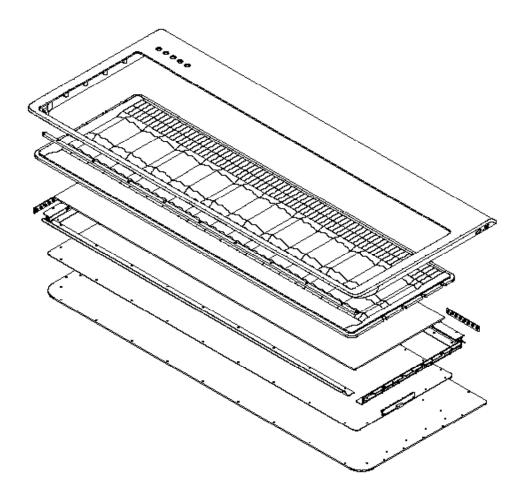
Seaboard LUTE A exploded isometric drawing April - September 2011
